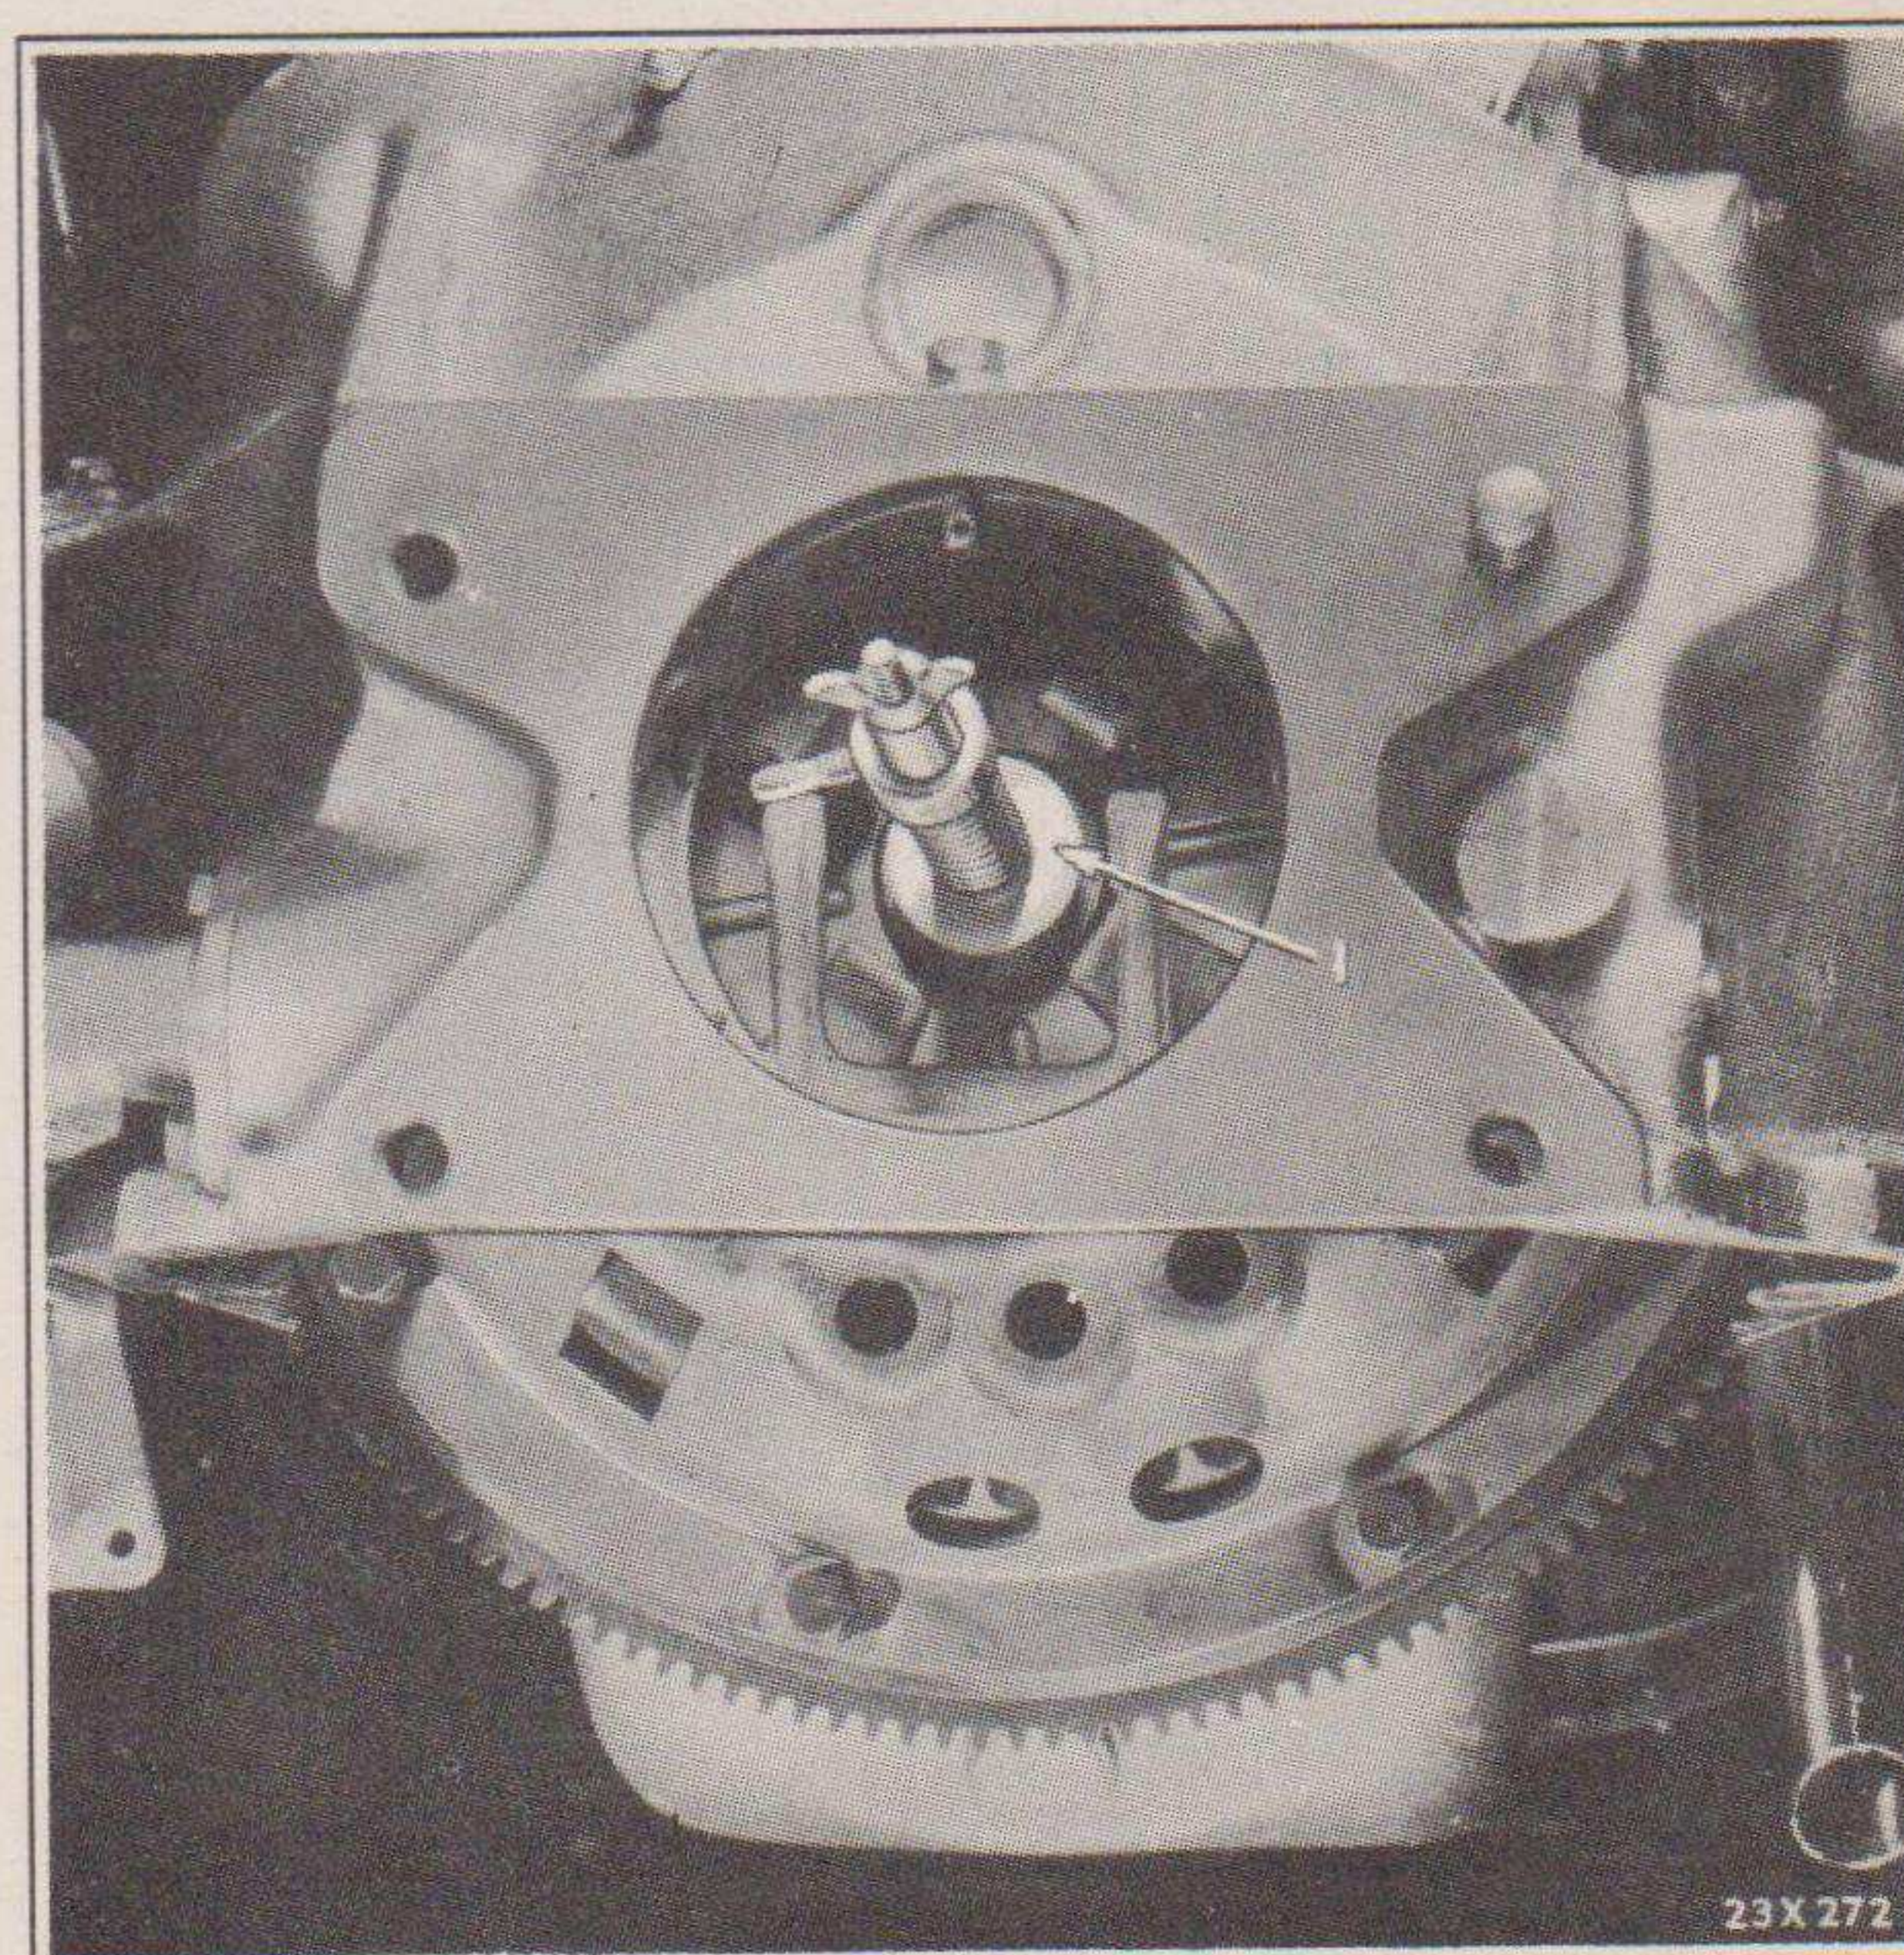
Clutch Disc Aligning Arbor (1—Tool C-360)
